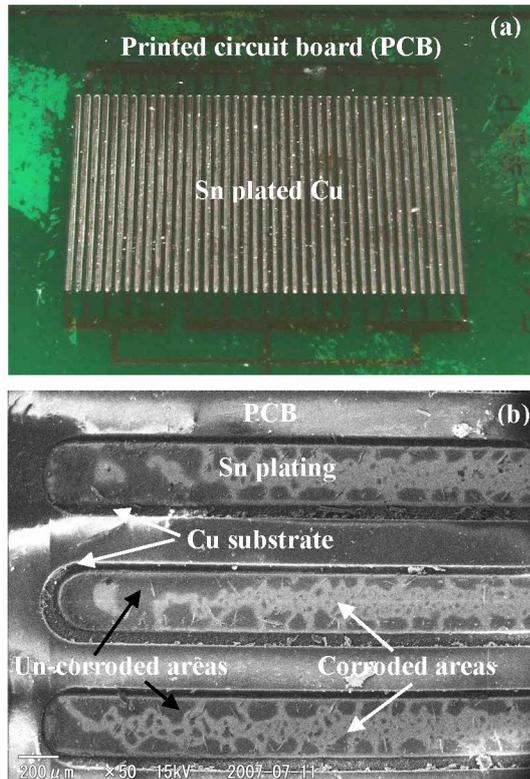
(a) A digital camera photograph showing all pins of Sn plated Cu on PCB and (b) a SEM micrograph showing magnified pins with corroded and un-corroded areas indicated with white and black arrows, respectively.
